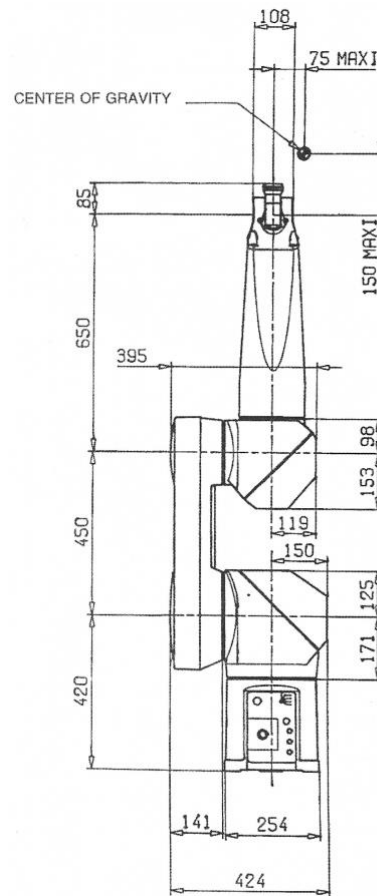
Overall Dimensions (mm) of Stäubli RX-90 Industrial Robot [51].
